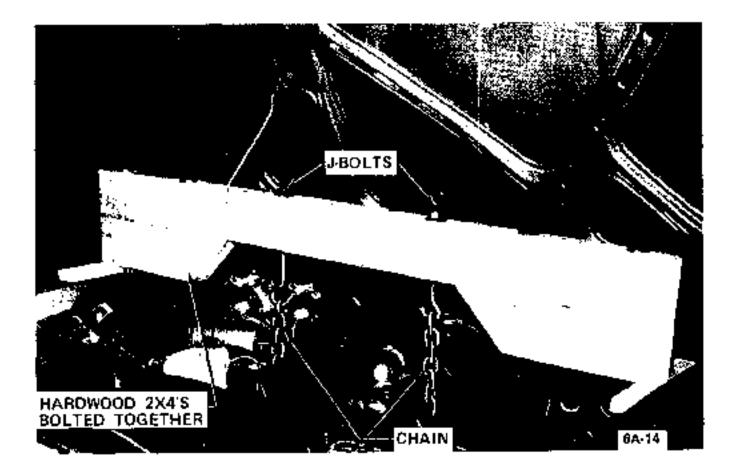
A-14 Engine Support Tool · Opel 1900 and Manta.
